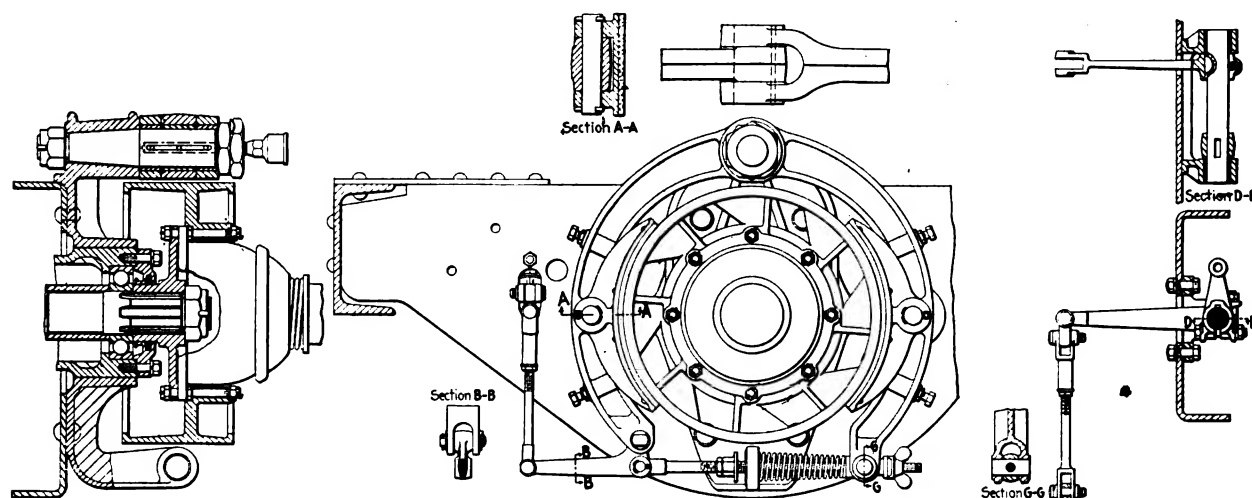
CONTRACTING-SHOE TYPE BRAKE MOUNTED ON THE TRANSMISSION OF THE PACKARD TRUCKS AND OPERATED BY A HAND-LEVER
